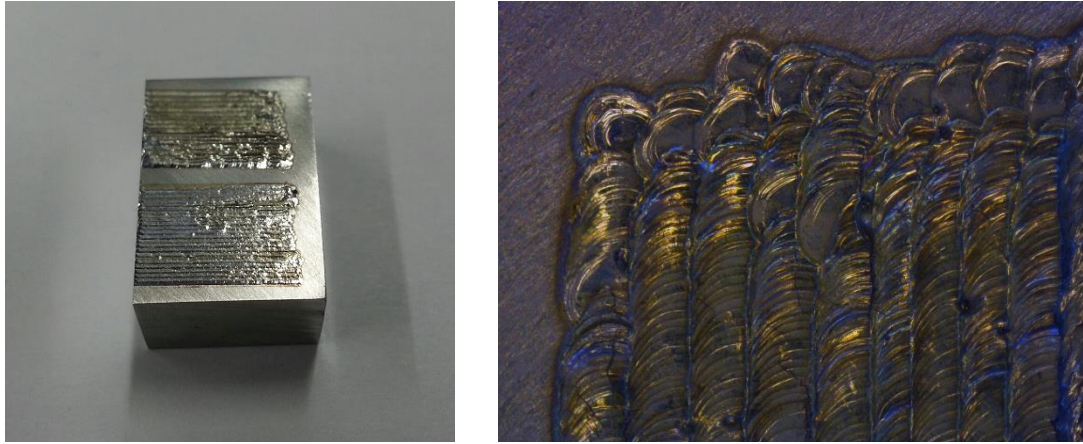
Image of the as received Co-Cr-Mo-C alloy. Laser surface modified specimen (left) and the laser weld beads profile taken in stereo microscope (right).
